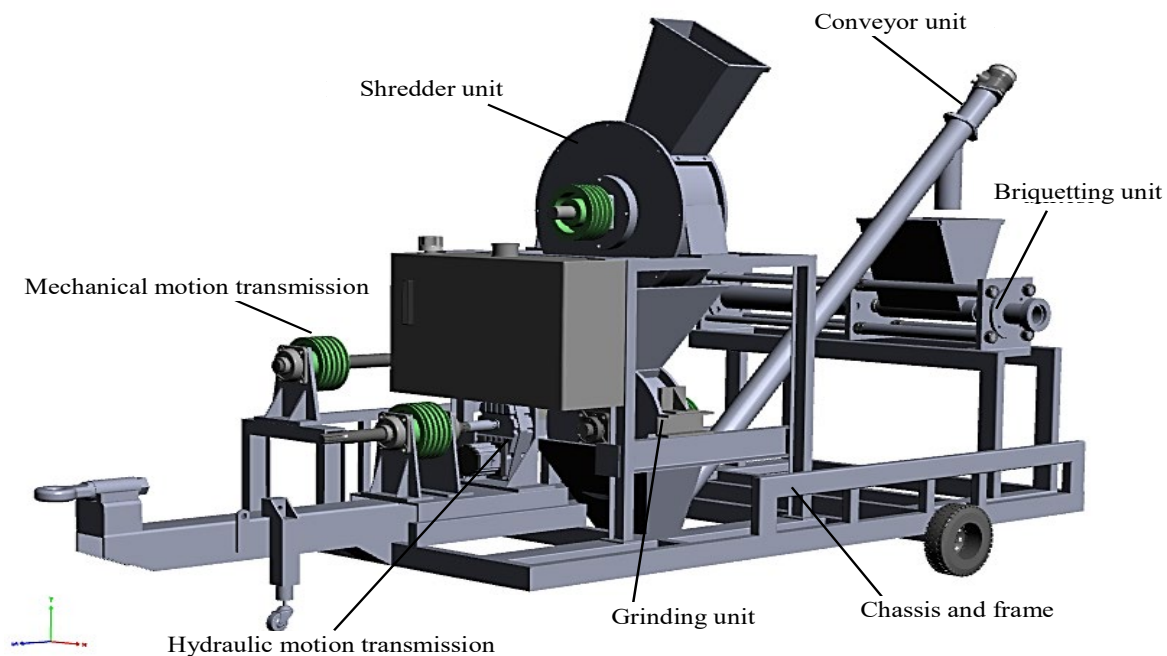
Prototype mobile hydraulic piston briquetting machine driven by PTO (power take-off)
